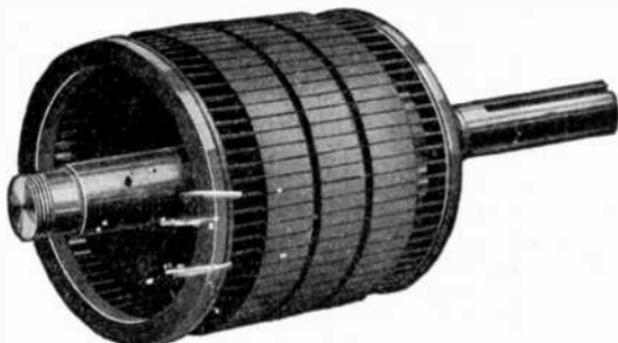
,701.—Fairbanks-Morse type H, squirrel cage armature mounted on shaft.
